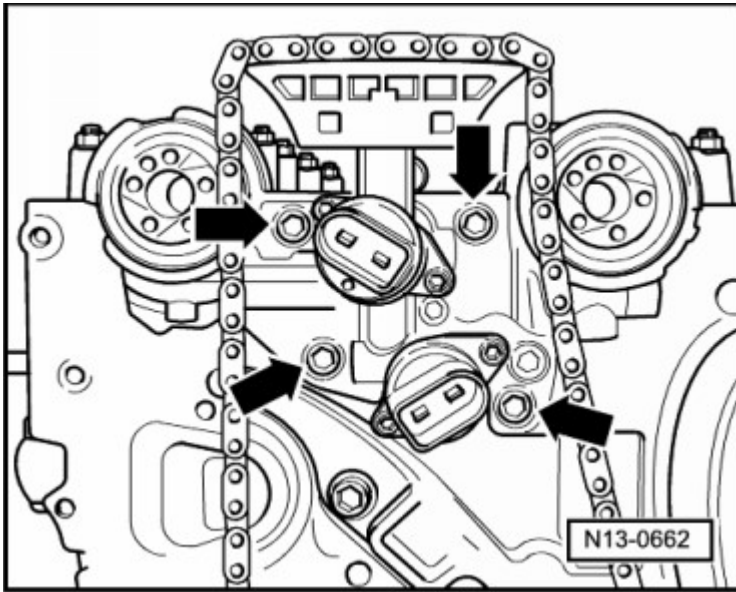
Locating Control Housing-To-Cylinder Head Bolts
